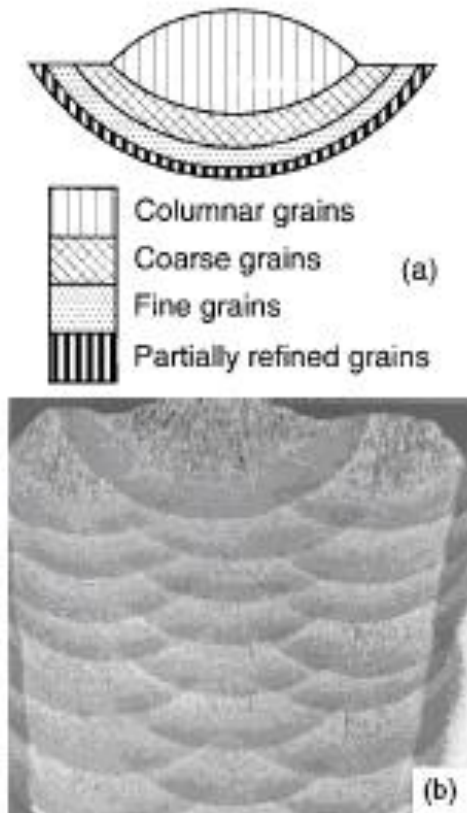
Grain refining in multiple-pass welding: (a) single-pass weld; (b) microstructure of multiple-pass weld. Reprinted from Evans (10). Courtesy of American Welding Society.
